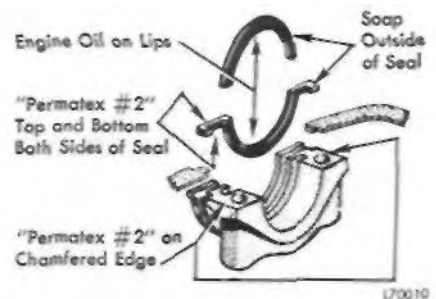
Rear Main Oil Seal and Cap Installation
